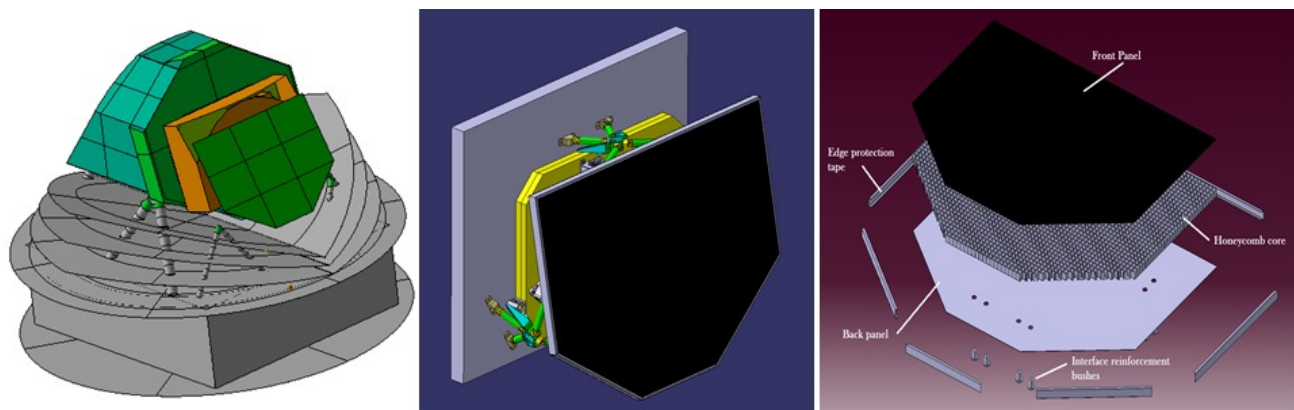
Instrument radiator: position in PLM (left), CAD views of the mounting on IOB (centre) and of the sandwich (right)
